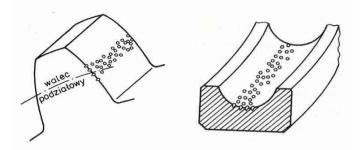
A schematic of the surfaces damaged by pitting: the side of the gear, track of the roller bearing.
